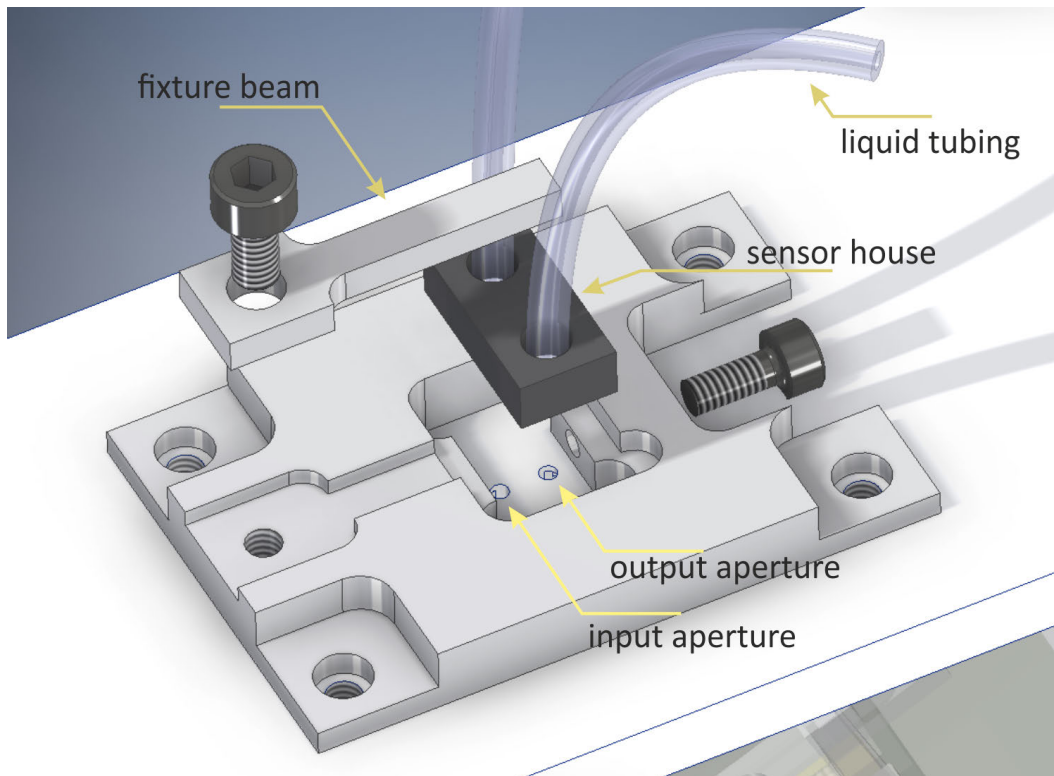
Illustration of the sensor mount for packaged waveguide sensor. The input and output apertures are illustrated. Tubing for liquid input and output are mounted from top. A fixture beam applies pressure from top and a screw from the right for fixing the sensor house.
